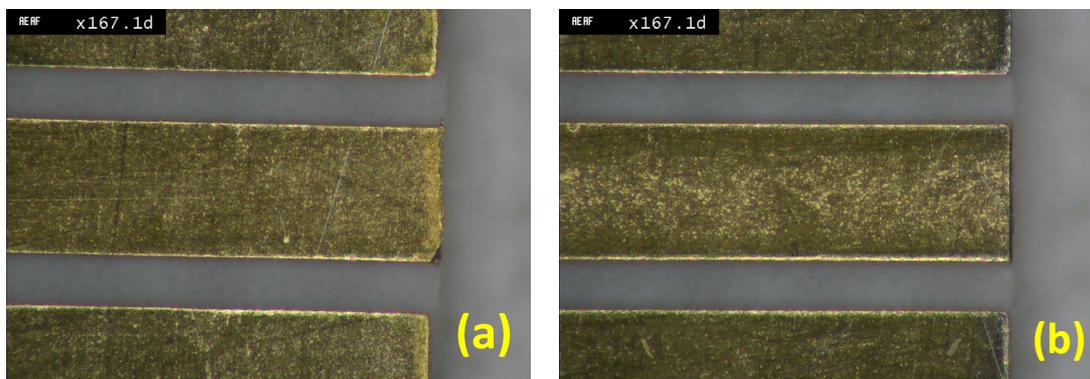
Test board transmission line: (a) rough edge (before cleaning), (b) smooth edge (after cleaning)
